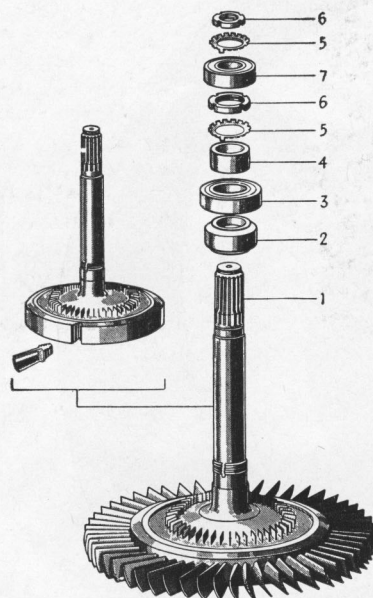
GE I-40 turbine rotor construction: (1) wheel, shaft, and bucket assembly; (2) oil deflector; (3) roller bearing; (4) rear spacer; (5) lock washer; (6) lock nut; (7) ball bearing.
